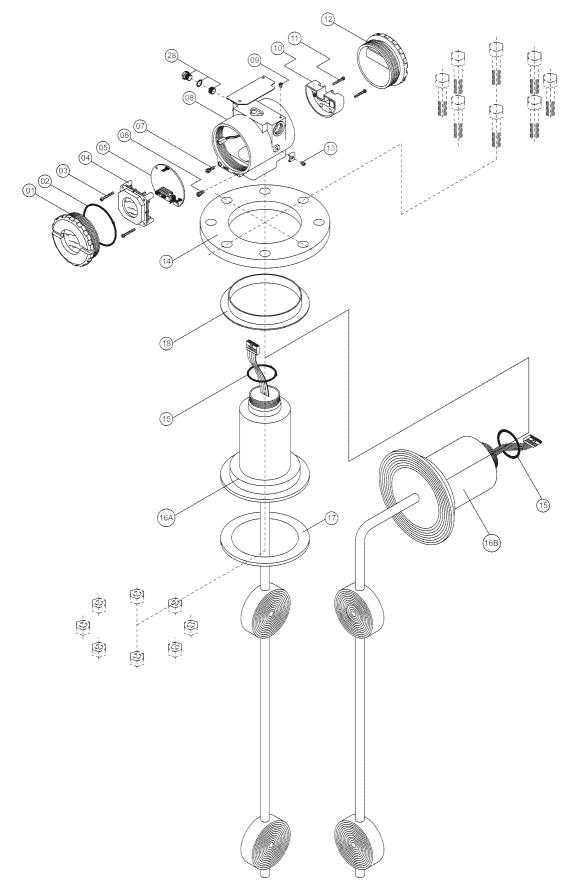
DM-Series - Exploded View (Industrial Model)
